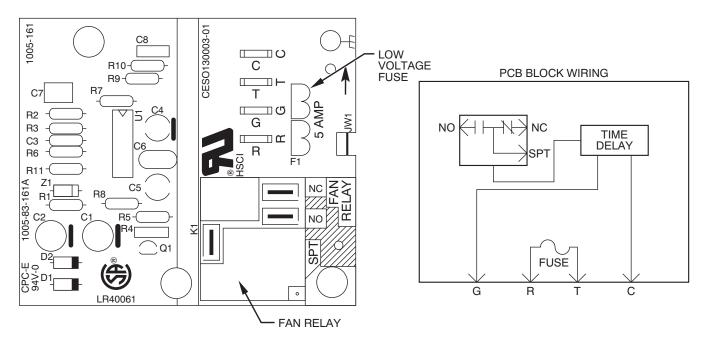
Fan Coil Printed Circuit Board (CES013003-00, 01 / HK61EA002)
